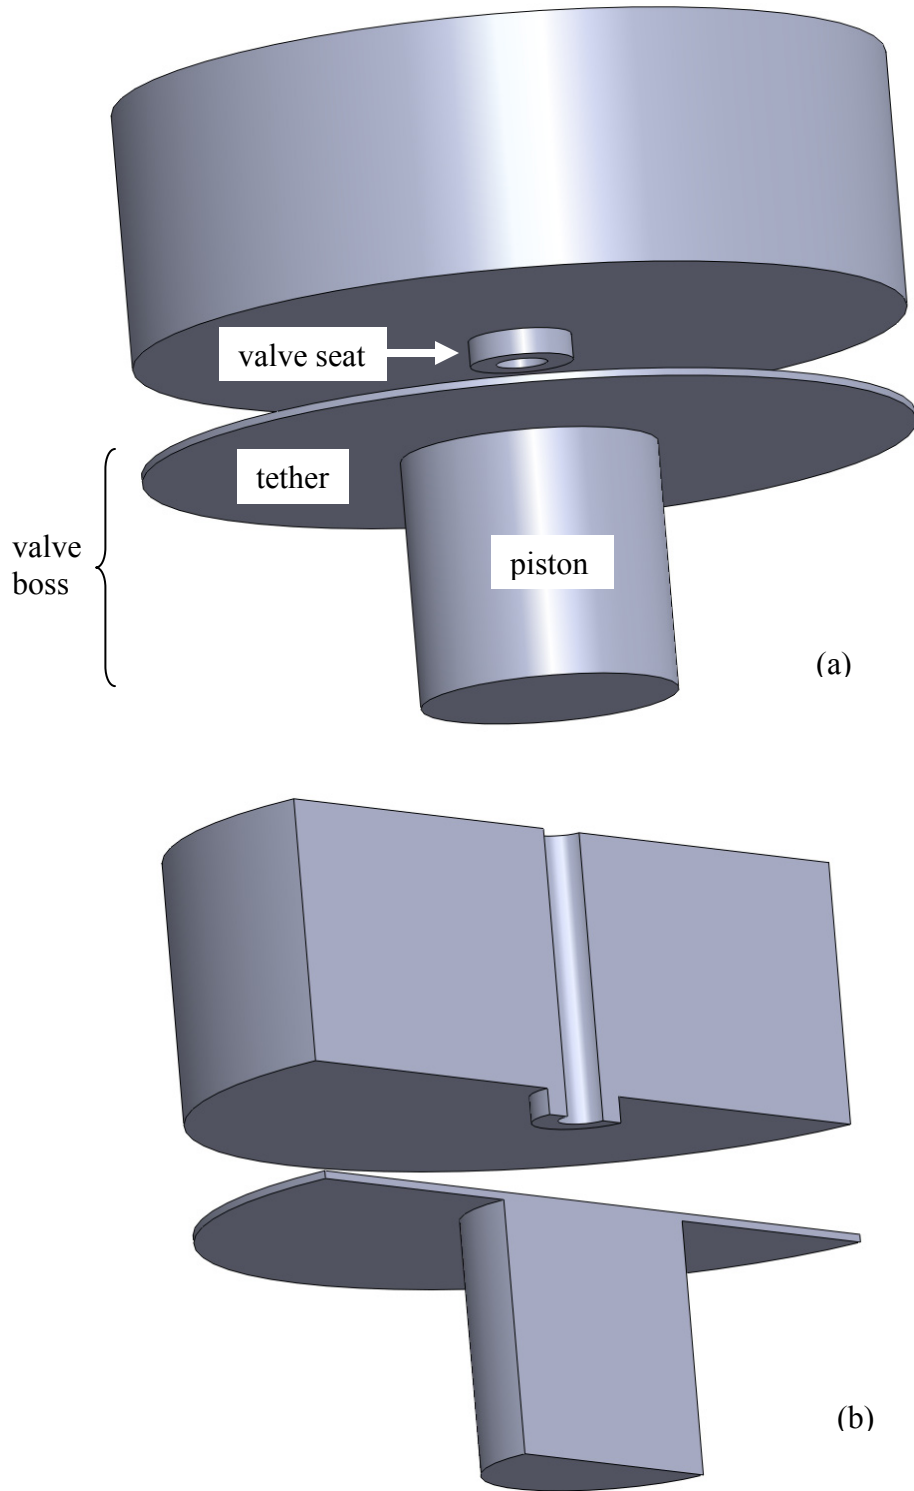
Schematic views of a pump valve. (a) 3D view, (b) cross-section.
